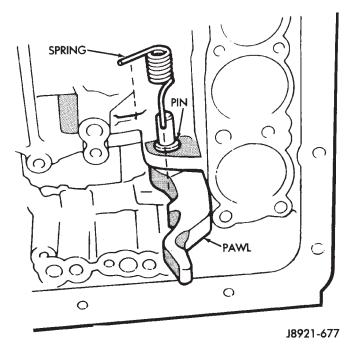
Installing Park Lock Pin, Spring And Pawl
